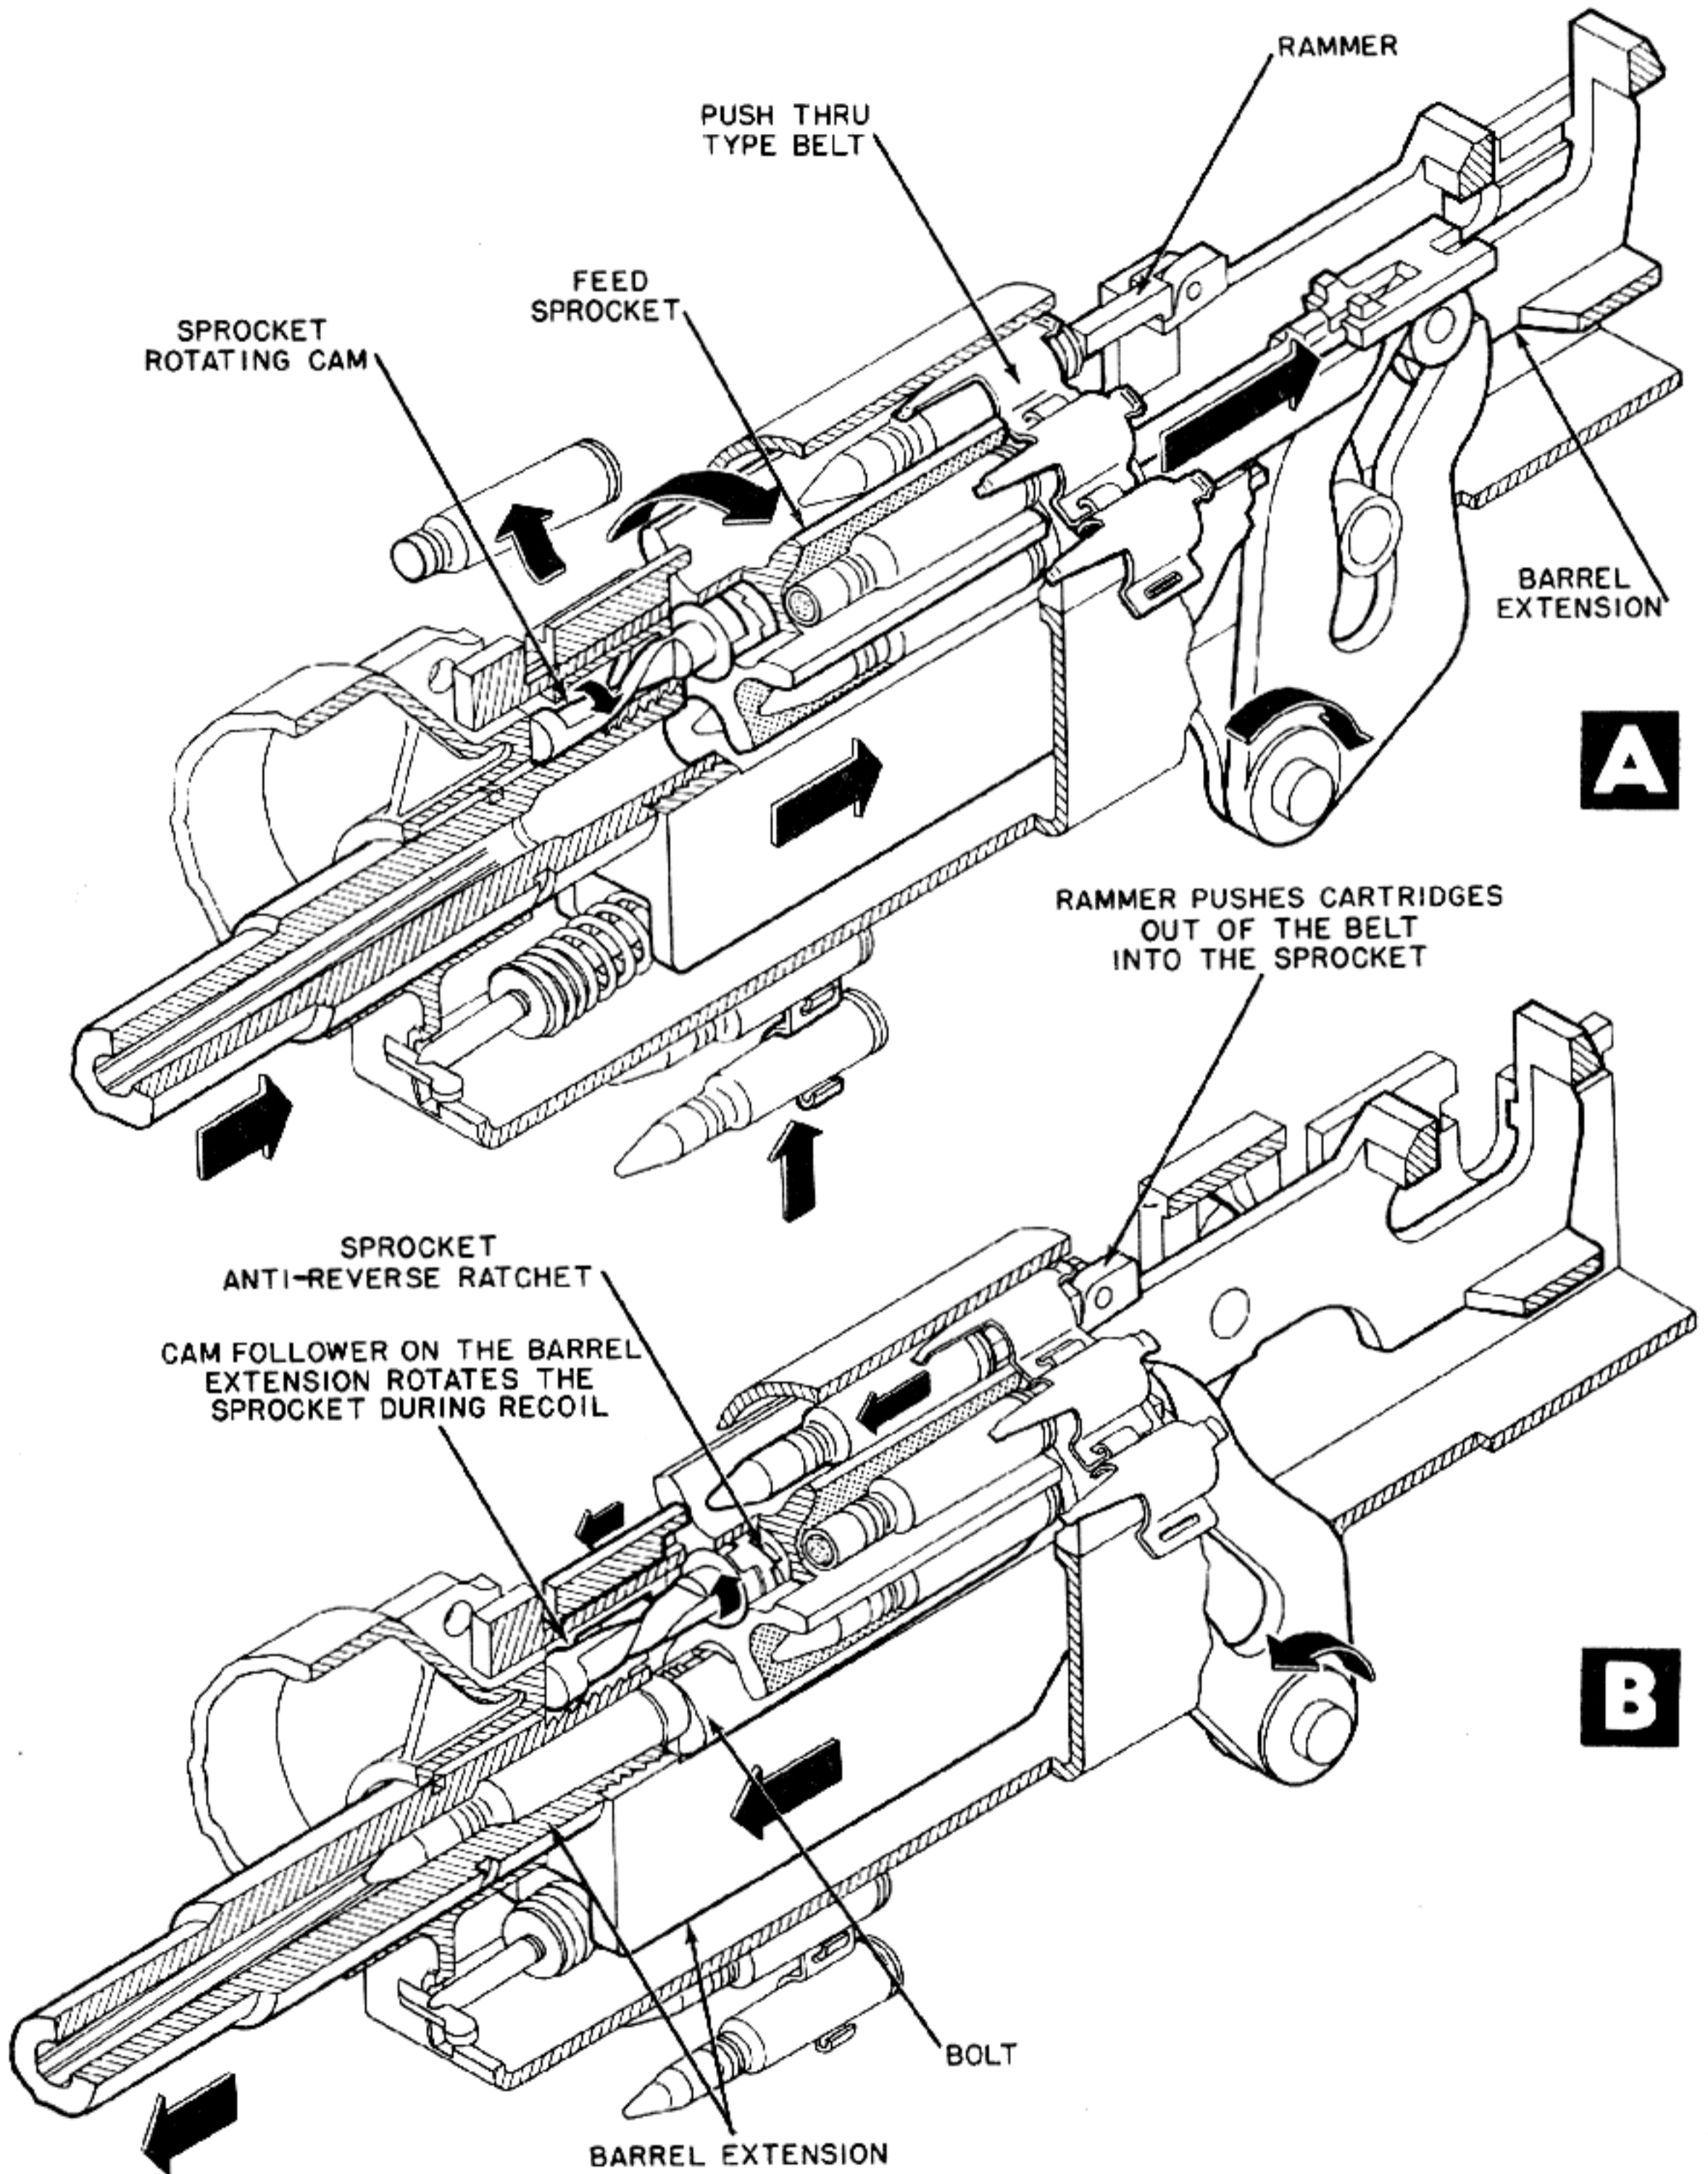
Cam Follower on Barrel Extension Rotates Feed Sprocket.
